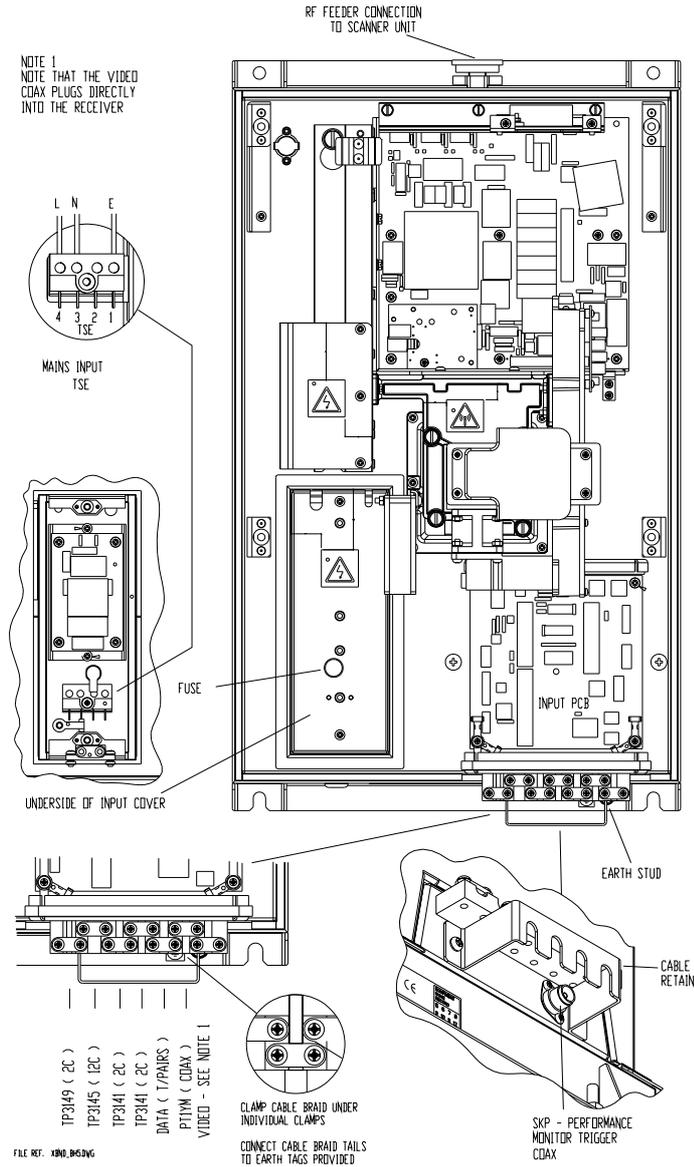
X-band Bulkhead Transceiver (early version) – Cable Input Details
